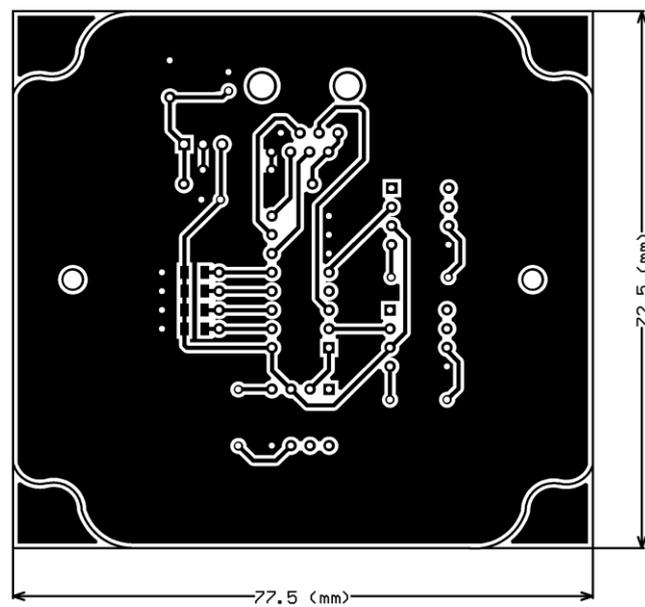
SENSOR BOARD'S BOTTOM LAYER.
